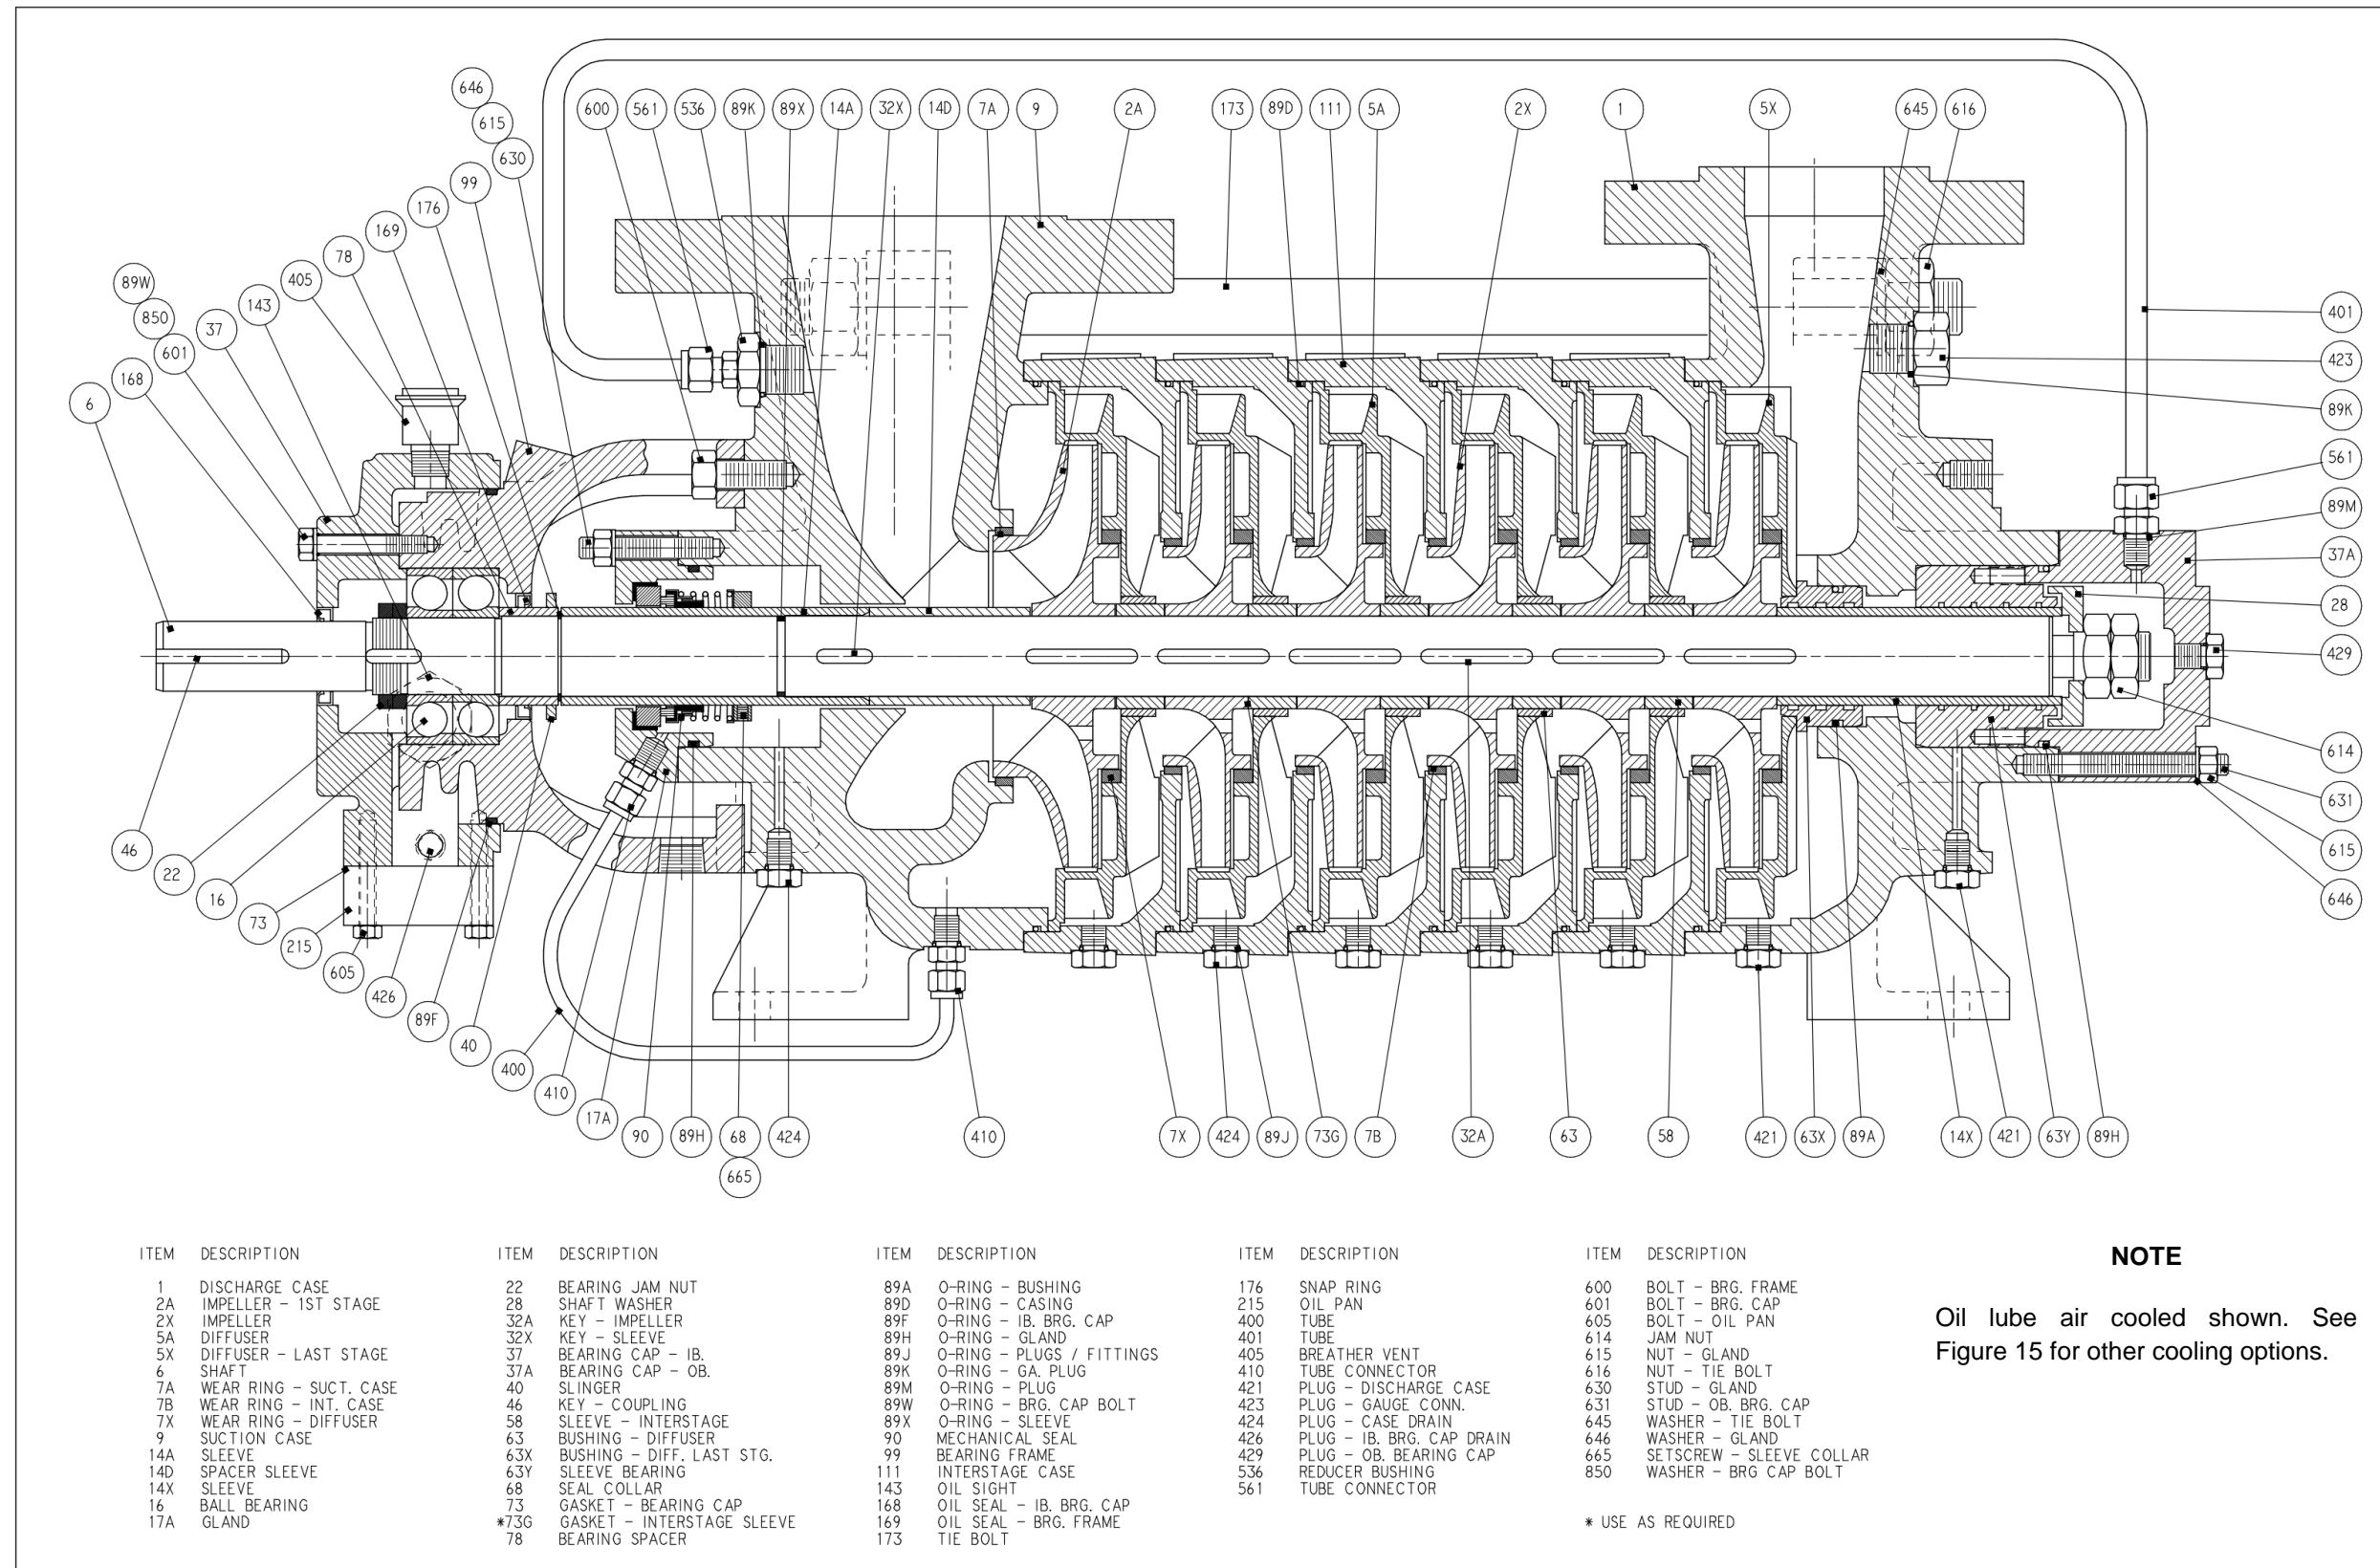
Sectional Assembly – Standard Sleeve Bearing
